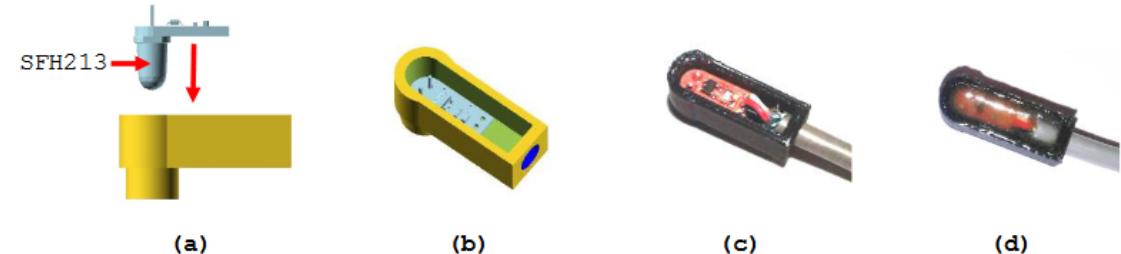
a) CAD model showing the photodiode amplifier PCB insertion into the module housing. b) A CAD model of the PCB located in the housing. c) The actual photodiode amplifier located in the 3D-printed module housing with cable attached. d) The module potted with epoxy resin.
